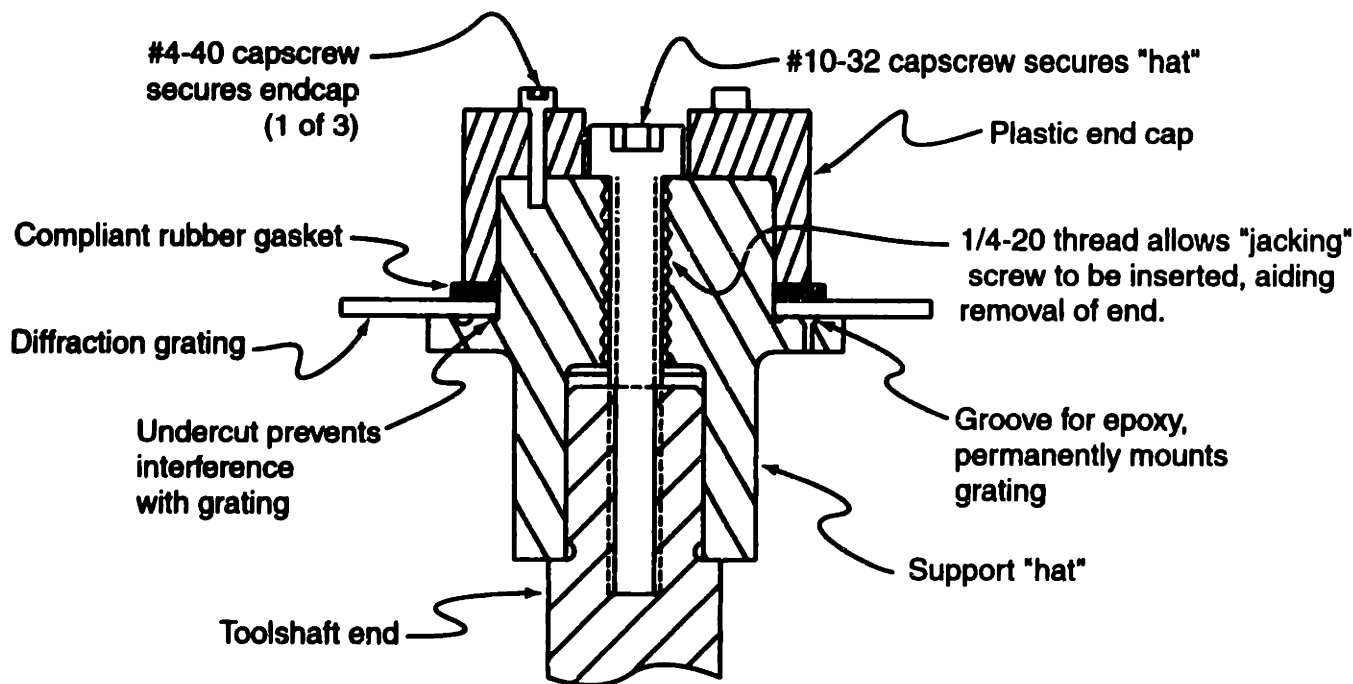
Cross-section of the mechanical mounting of the diffraction grating. Important features include the smooth mounting surface perpendicular to the rotation axis, and a compliant clamping mechanism.
